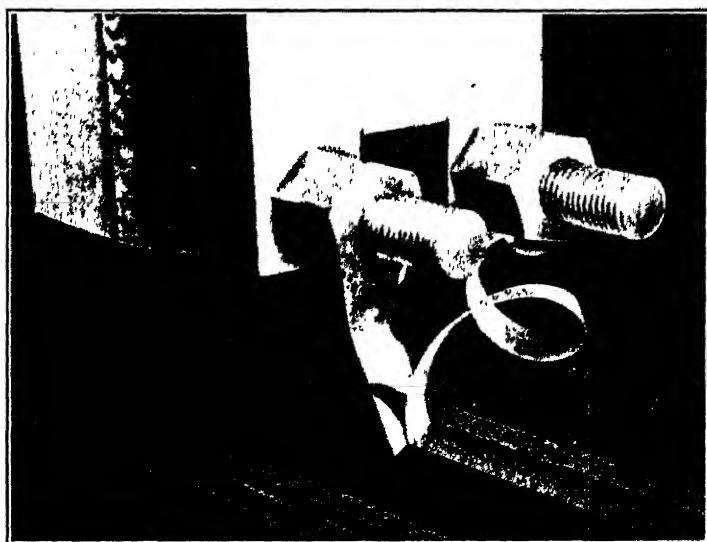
A 30-DEG. SIDE RAKE, 30-DEG. FRONT RAKE, 4-DEG. CLEARANCE ANGLE TOOL REMOVING A 0.15 PER CENT CARBON-STEEL CHIP 0.5 IN. WIDE AND 0.024 IN. DEEP
